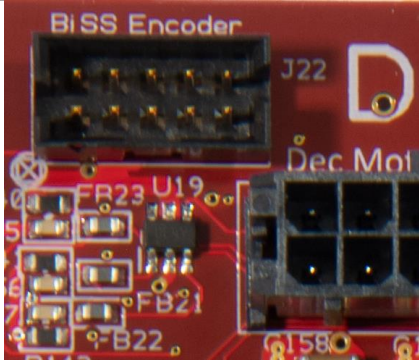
Electronics box with the MKS 6000 PCB cables and components.
